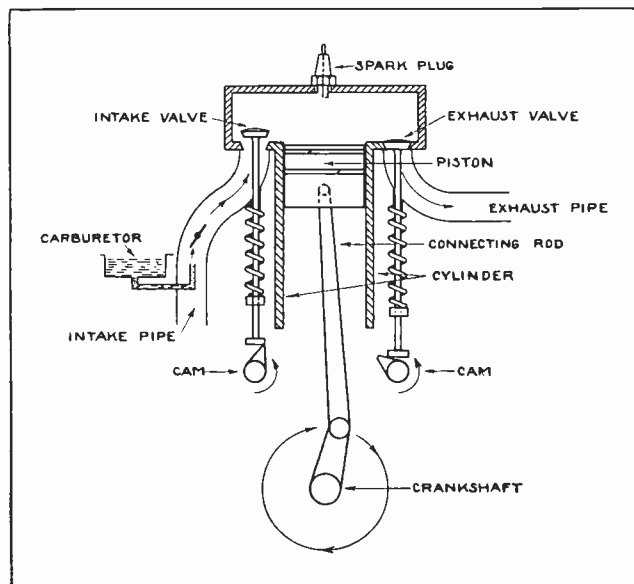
This diagram illustrates the operating principle of a simple one-cylinder internal combustion engine. Study the diagram carefully while reading the explanation.
